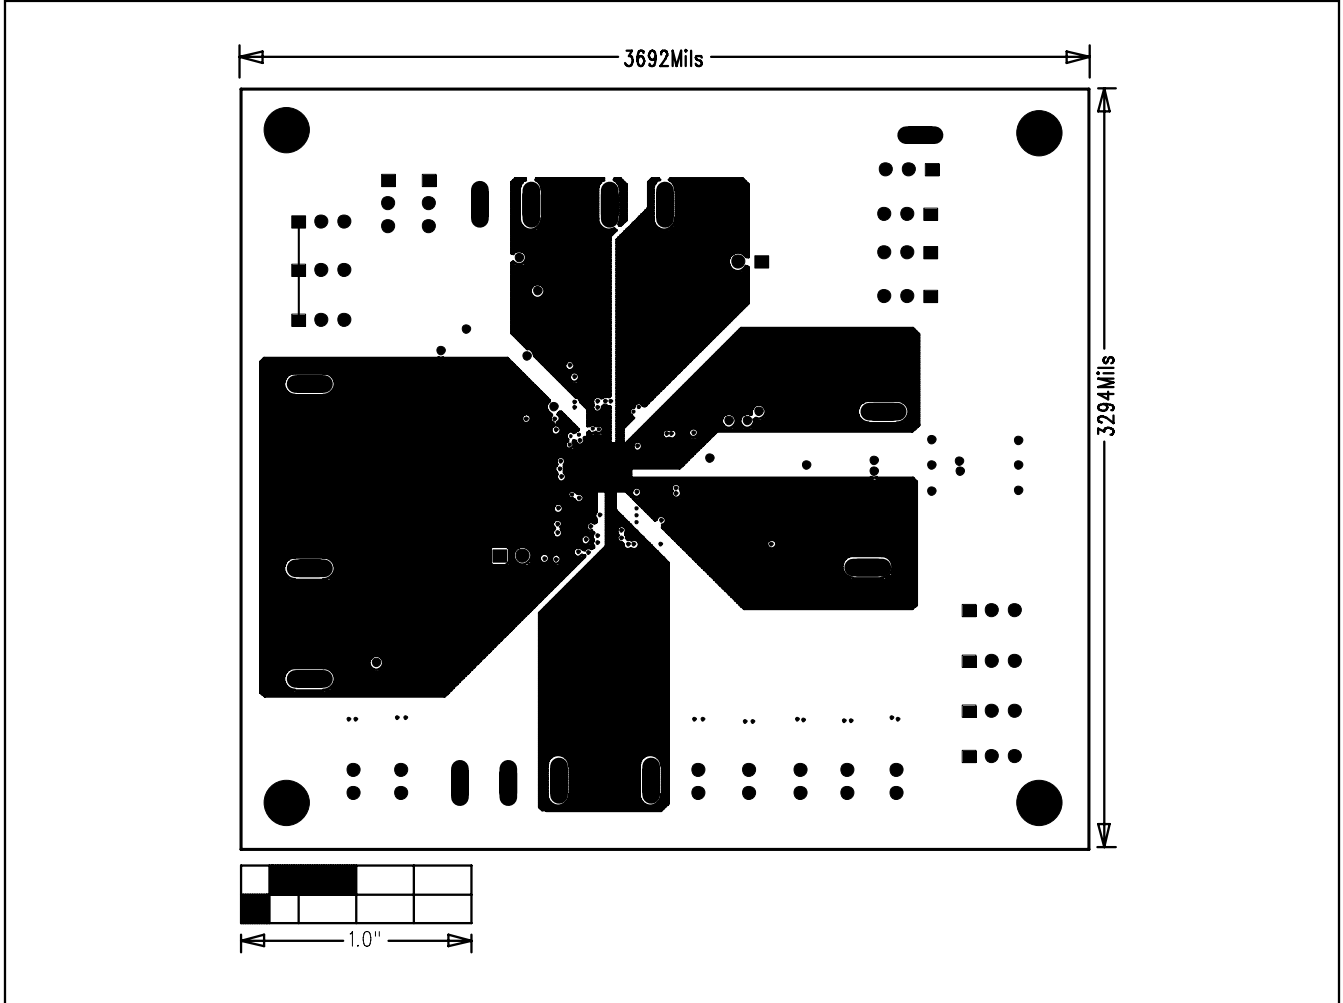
MAX8662 EV Kit PCB Layout—PGND Layer 2
